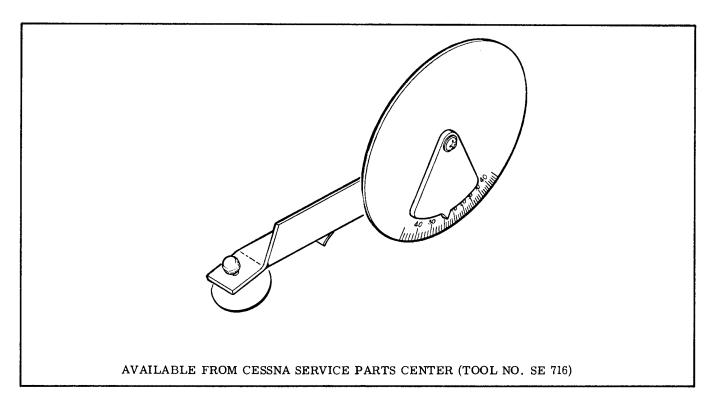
Inclinometer For Measuring Control Surface Travel
